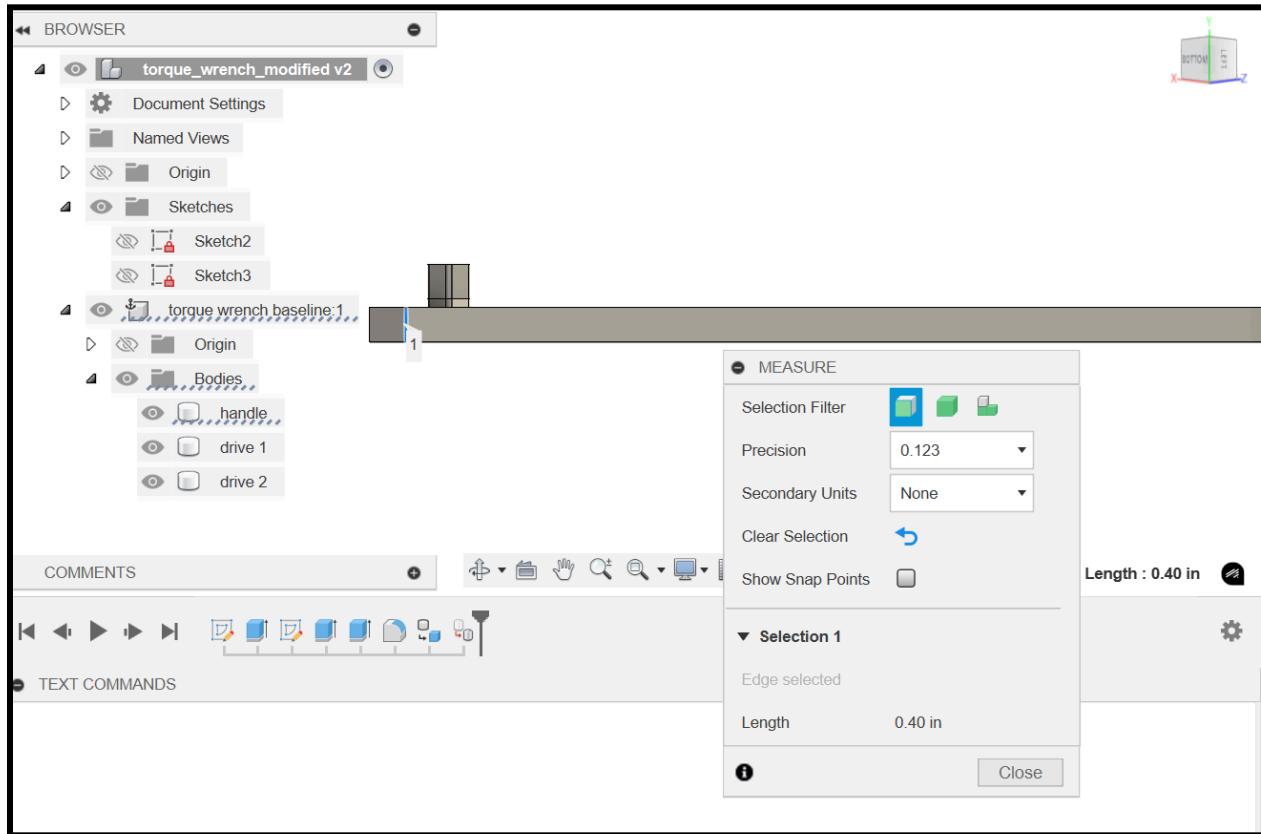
CAD dimension $b=0.5"$ (thickness of modified torque wrench).
